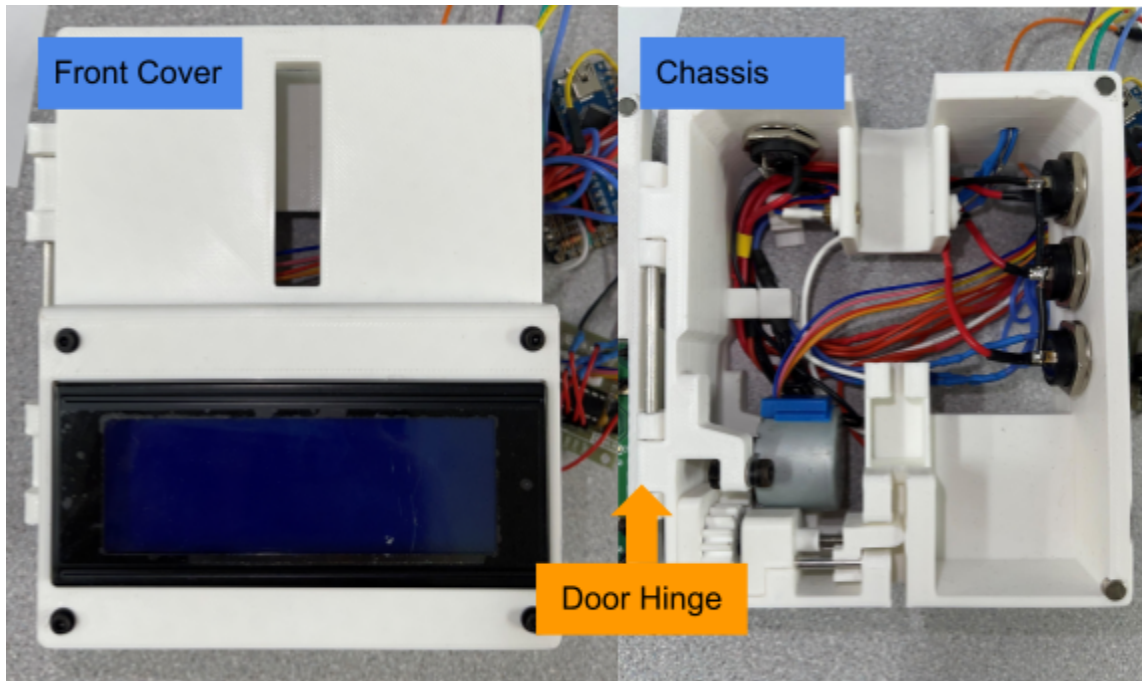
Manufactured chassis and front cover with iteration 4 in place for the pinching mechanism
